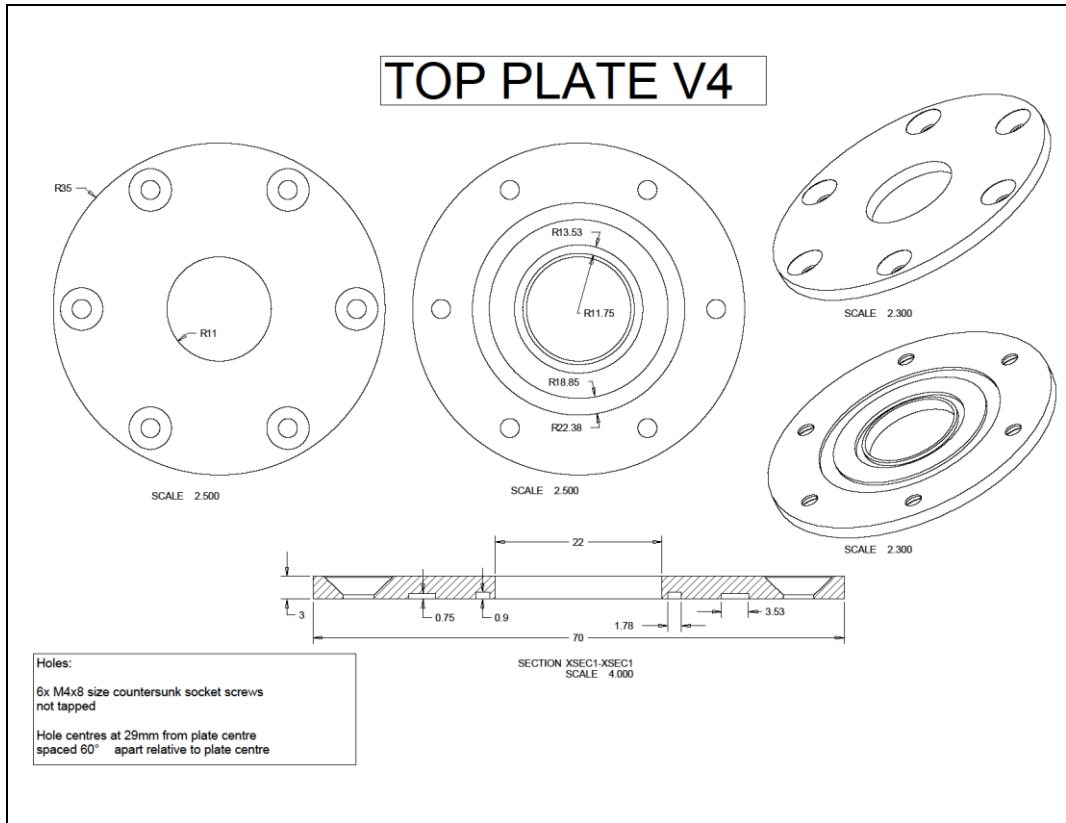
Design drawing for ALD mask top plate V4 (dimensions in mm)
